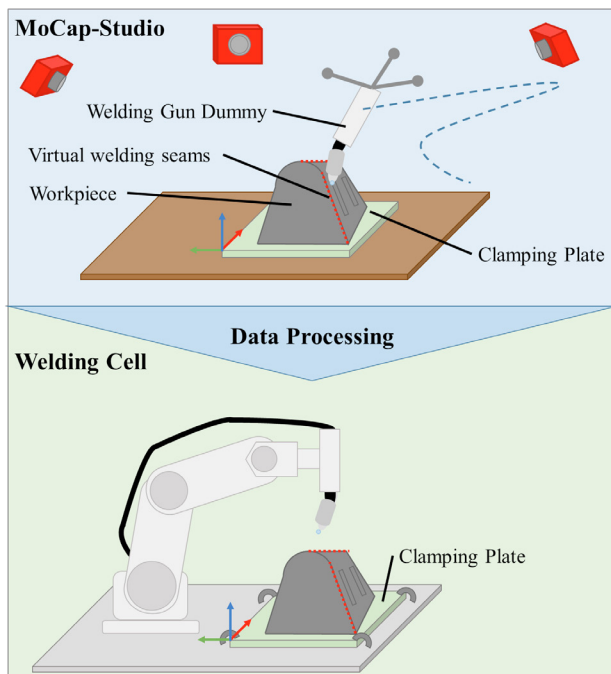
Illustration of the whole process for AR robot welding applications.
